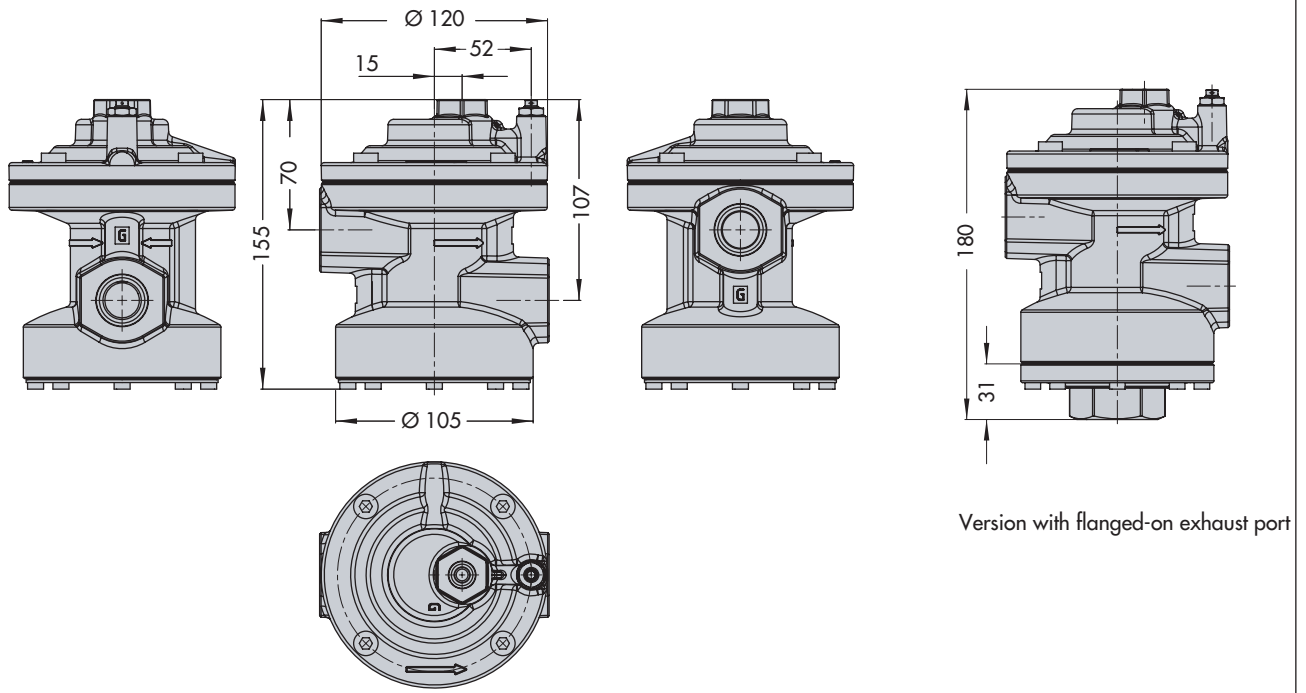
· Dimensional drawings of Type 3755 · Dimensions in mm
